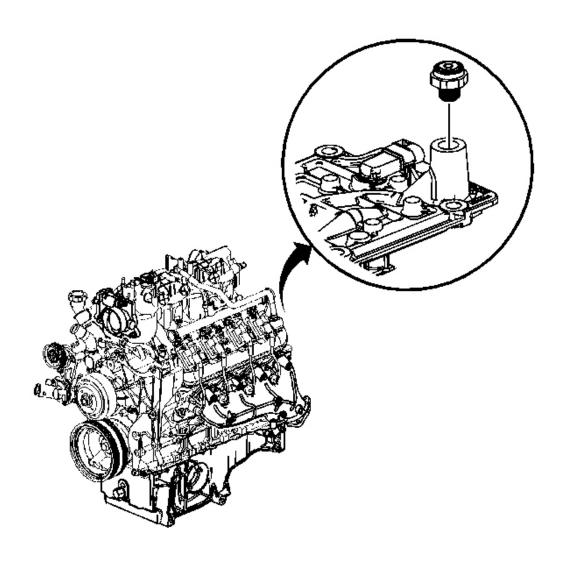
Oil Pressure Sensor Courtesy of GENERAL MOTORS CORP.
